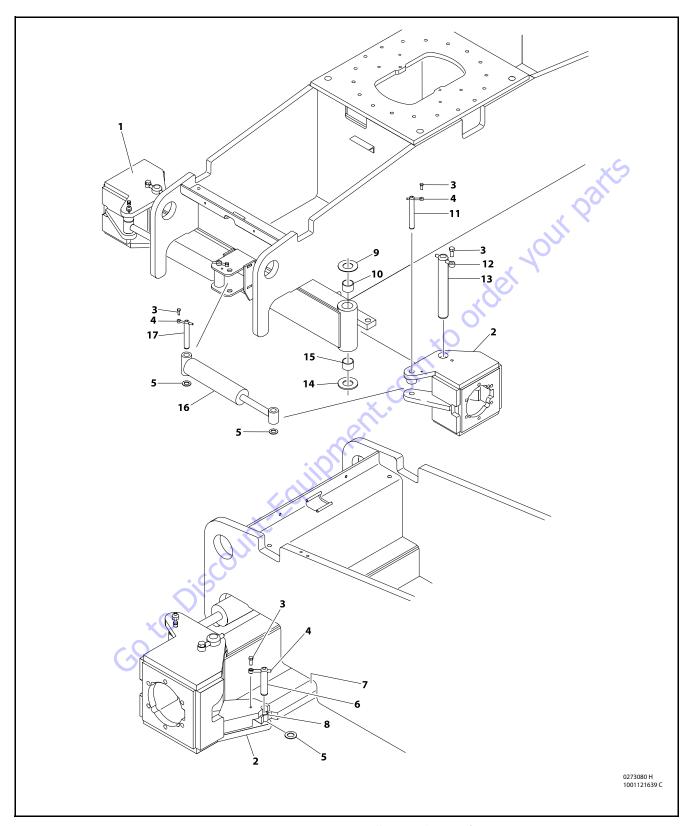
Rear Steering Installation - Sheet 1 of 2
